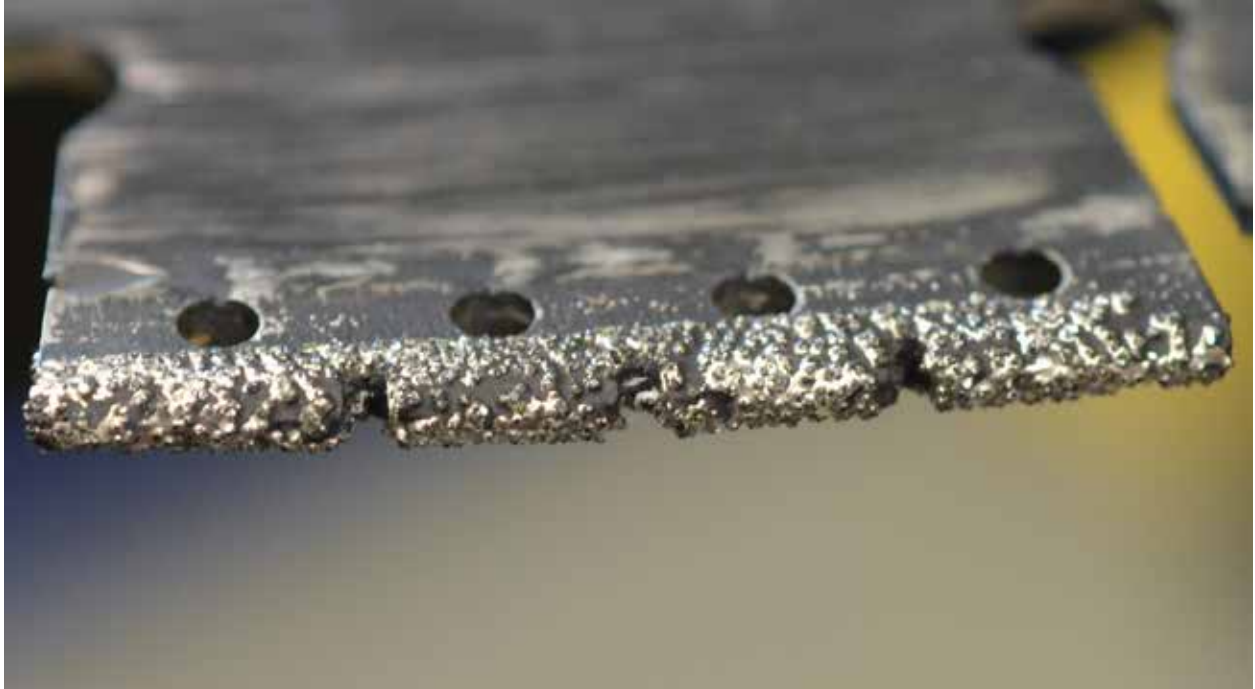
Diamond Saw Blade, G5, Wet Cuts
